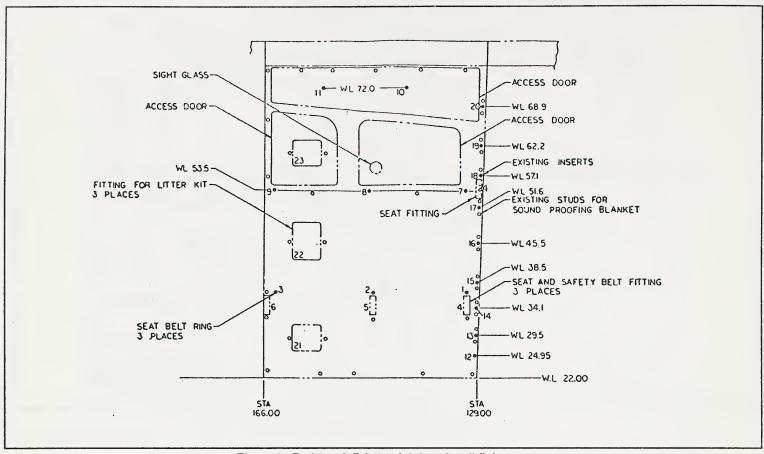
Bell 205A B.L.14 righthand wall fittings.
